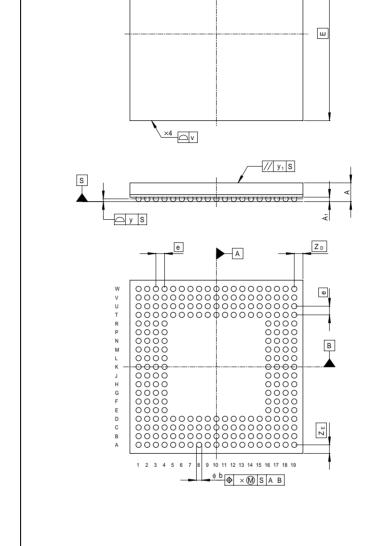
Package Dimensions (FP-208C, FP-208CV)
